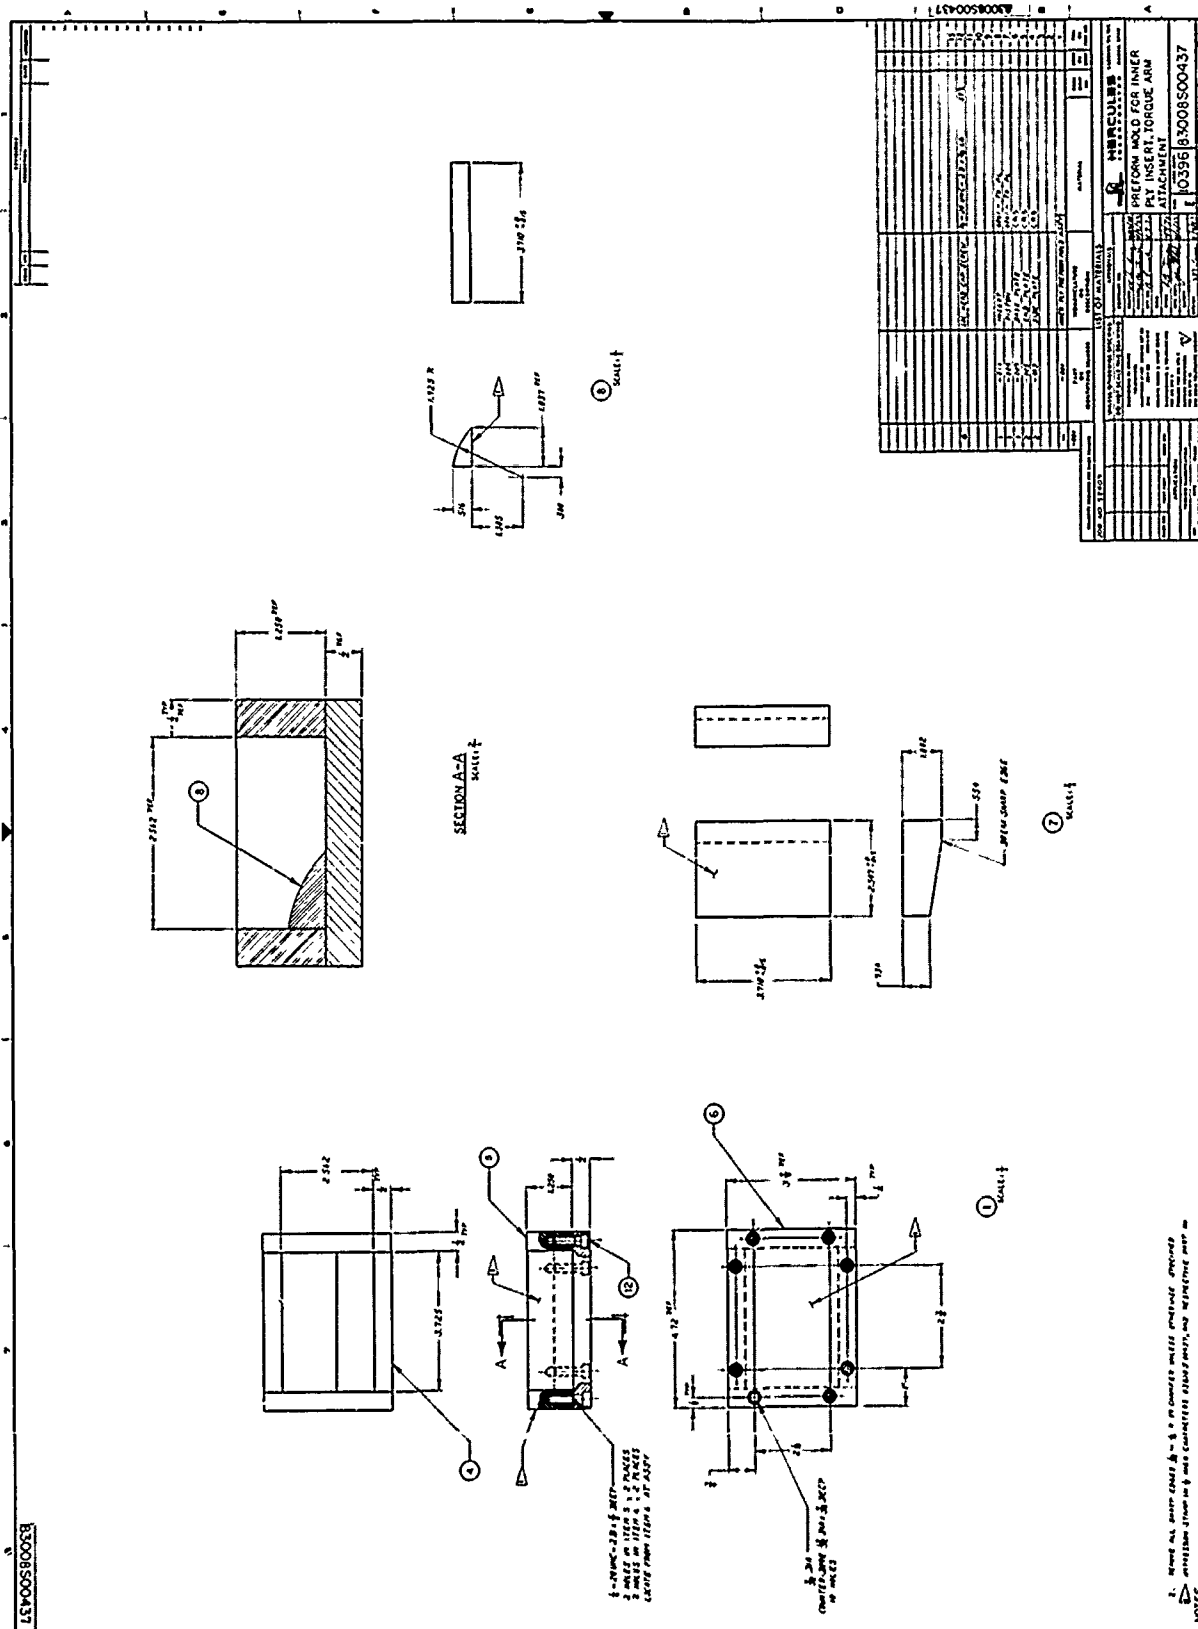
Inner Ply Insert Mold, Drawing 83008S00437
